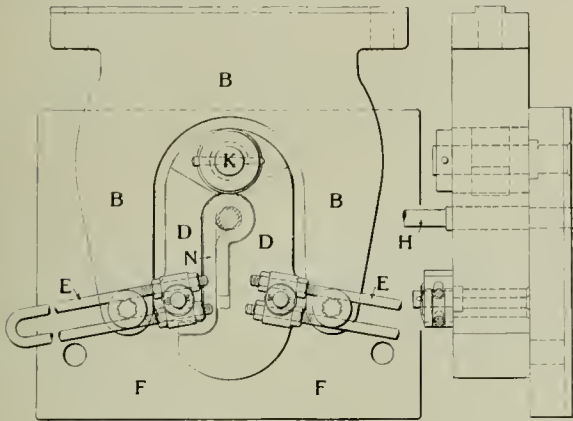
Arrangement of Dies for Forming Hinge Butts
